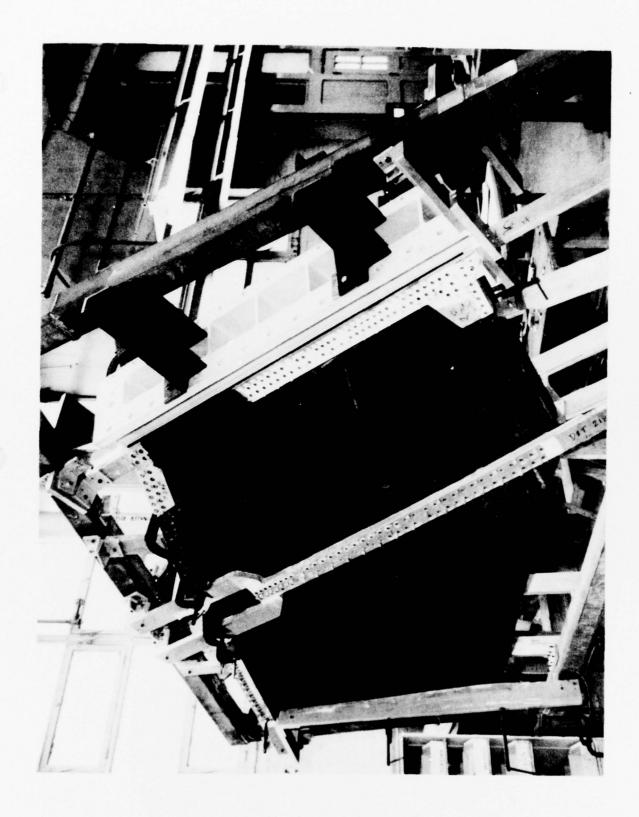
FRONT SPAR BONDED TO LOWER SKIN PANEL
